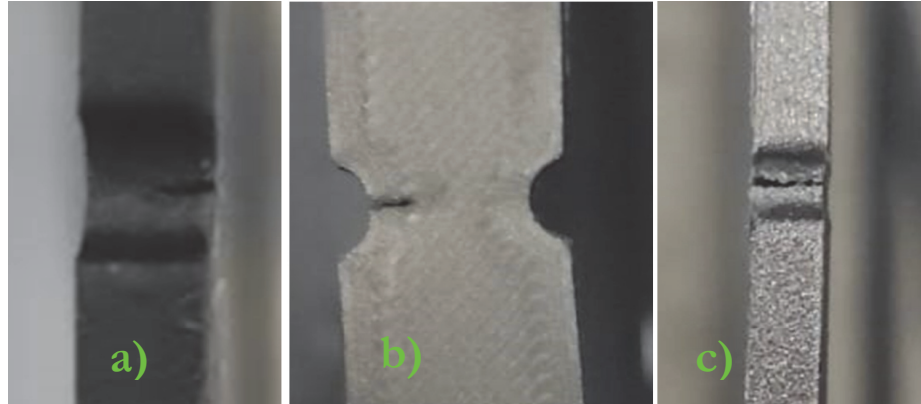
Crack growth in a U-notch for an initial 3 mm thick sample; a) lateral view of corner crack, b) front view of corner crack, c) through crack.
